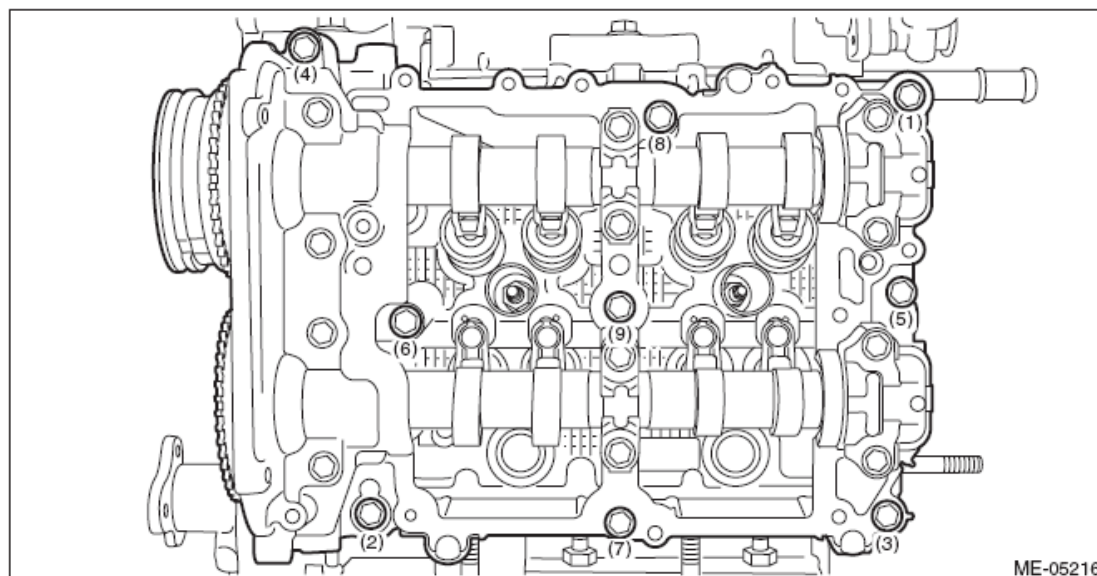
Identifying Cam Carrier Bolts Loosening Sequence
